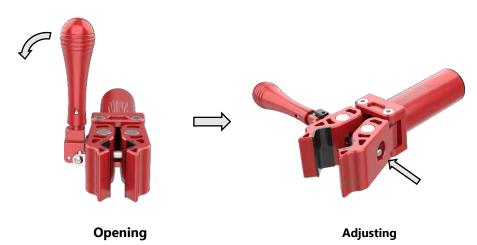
Opening and adjusting the width of the Clamp Jaws.
